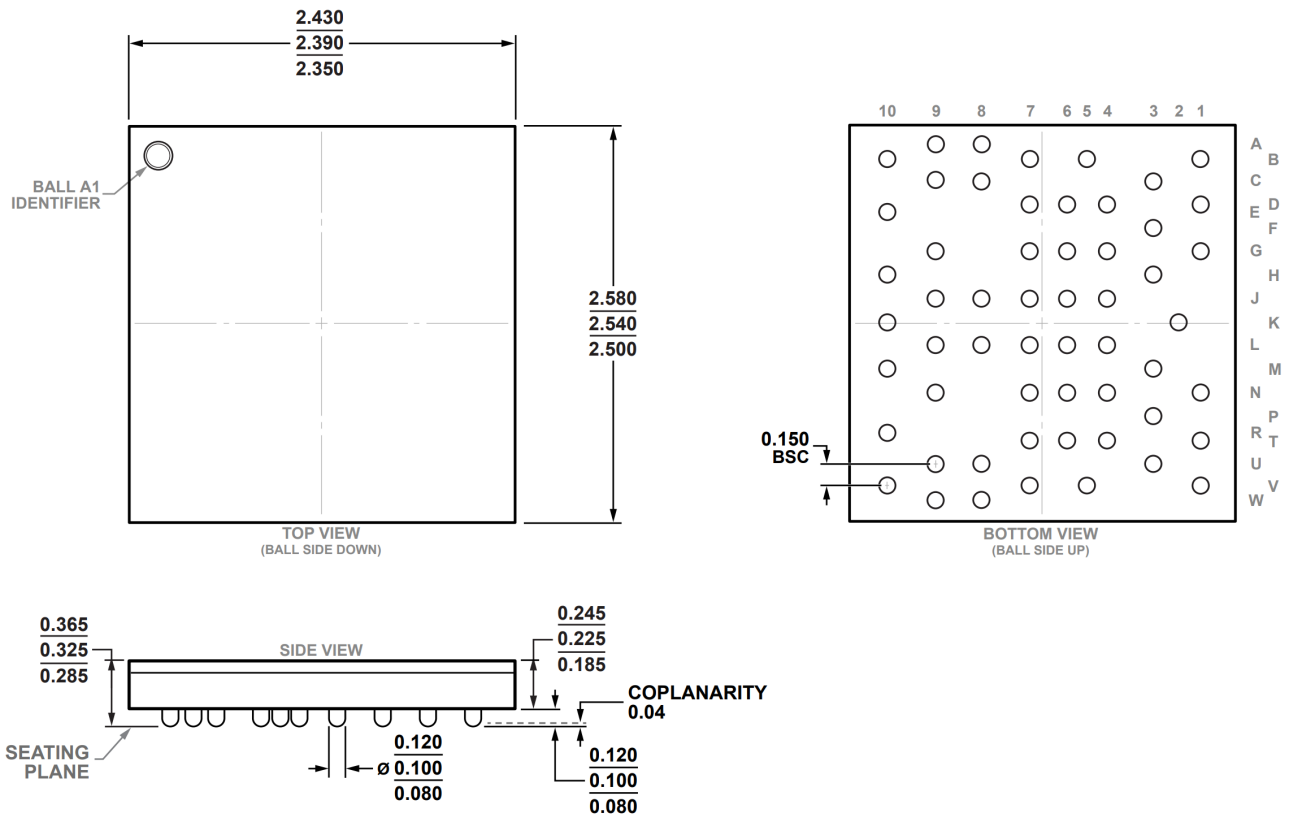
56-Ball Bumped Bare Die Sales [BUMPED_CHIP]
